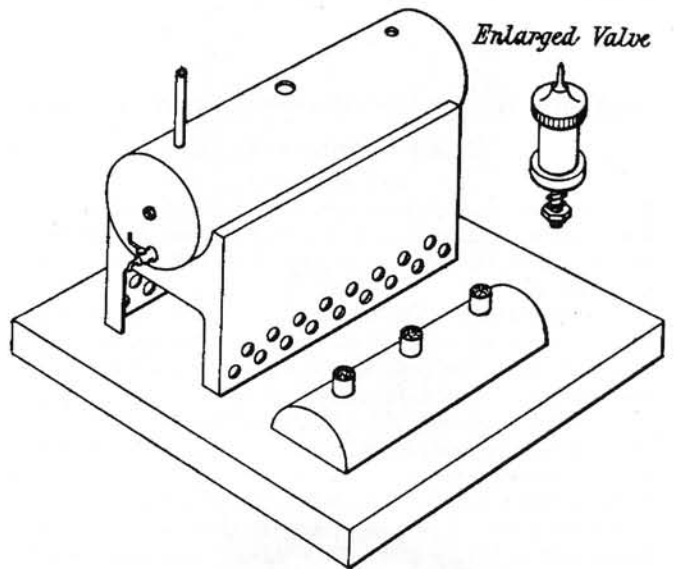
Sketch illustrating the Boiler and Type of Safety Valve.
